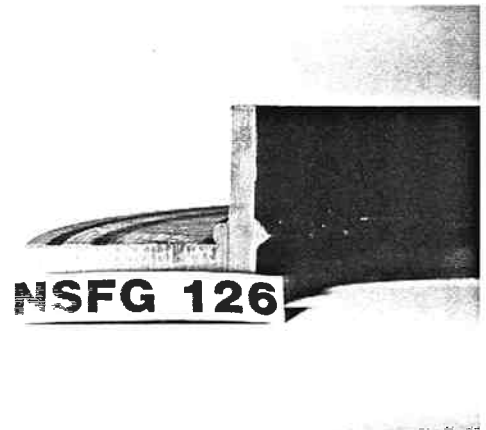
Cross section of a typical tube-to-flange weld
